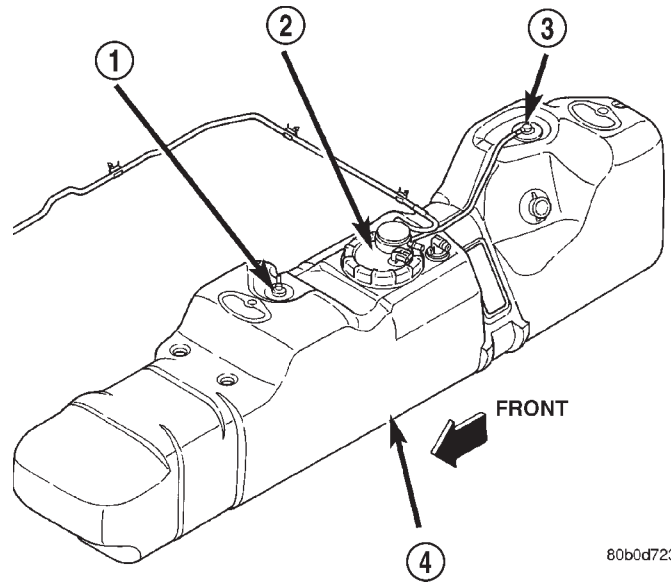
Check Valve Locations—Gas Engine With 35 Gallon Tank
